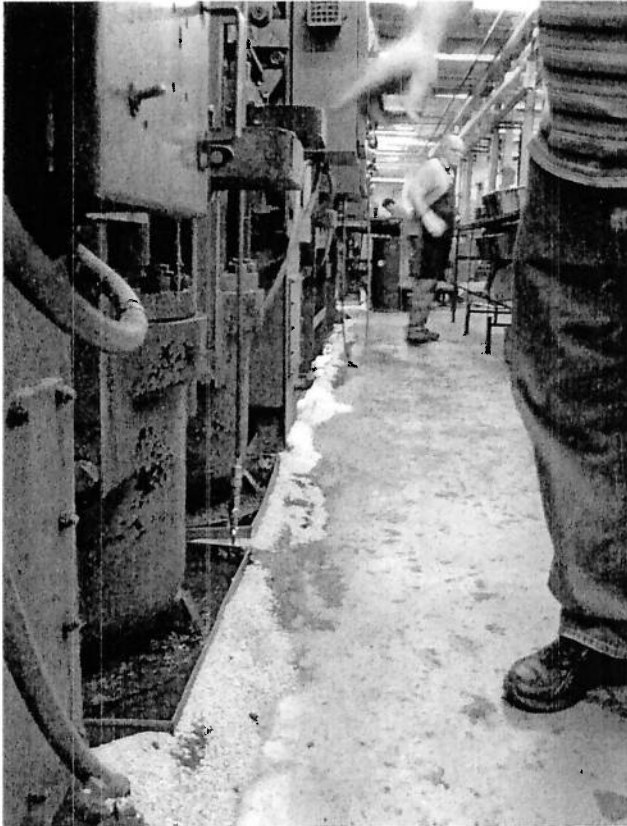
Steam Hydraulic Presses "line A" with drain pans, dyking, and absorbent
